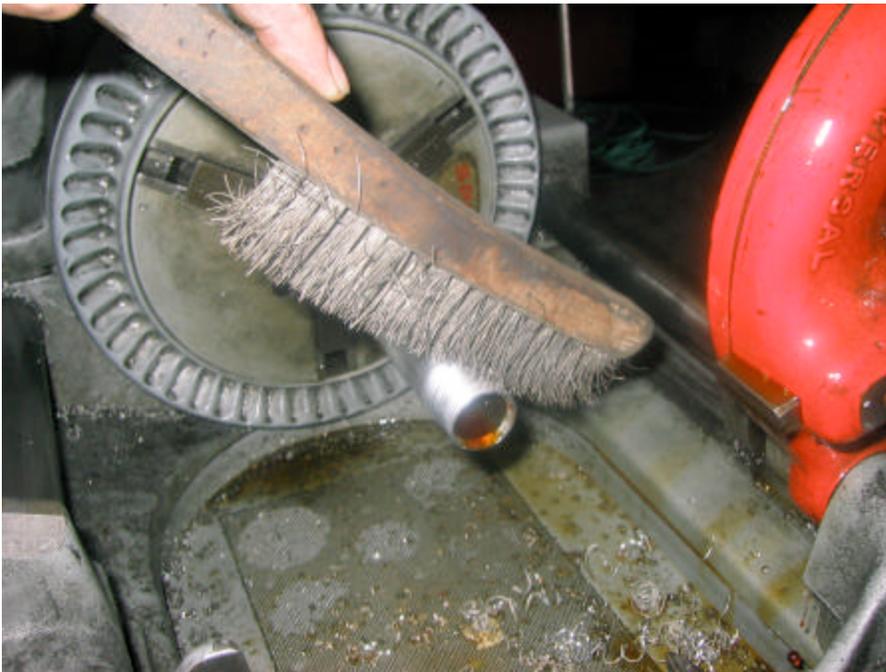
Brushing Chips from the Threads of Aluminum RMC
